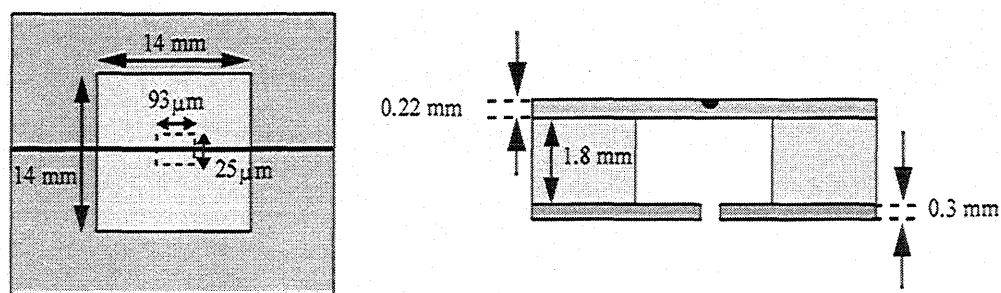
Top and cross-sectional views of the fabricated sensor and actual dimensions.
